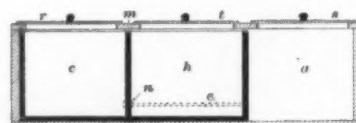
SECTIONAL VIEW OF THE CABINET SHOWN IN Fig. 47.
